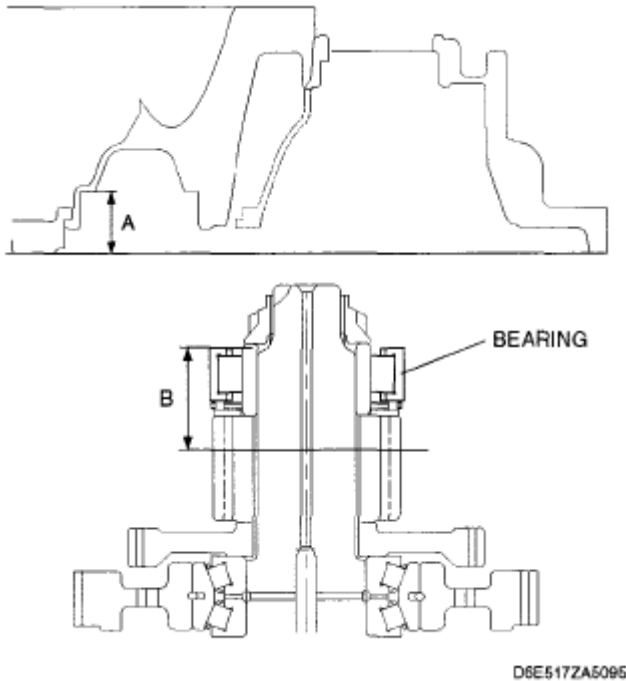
Measuring Clearance Between Converter Housing Installation Surface And Bearing
